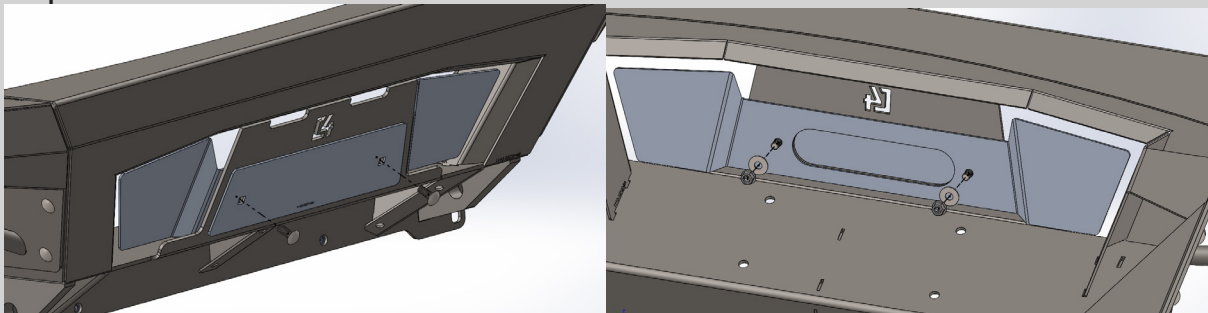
Winch cover plate secured with $\frac{3}{8}$ " carriage bolts, washers, and flange nuts.
